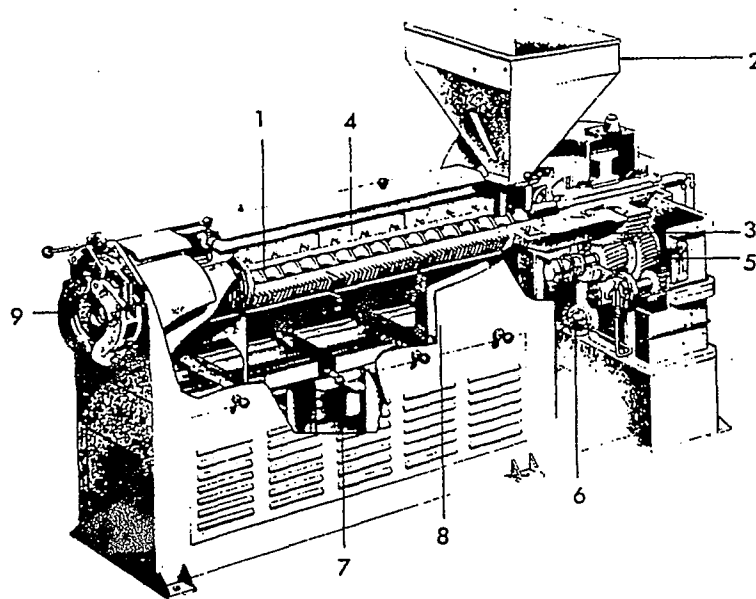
Sectional view of a single screw plastics extruder. 1. screw; 2. hopper; 3. feed section; 4. barrel heaters; 5. gear box; 6. lubrication system; 7. air blowers to control barrel heating and cooling temperatures; 8. double walled hood for balanced air flow; 9. die clamp assembly. (From Francis Shaw Co., Ltd., Manchester, England.)
